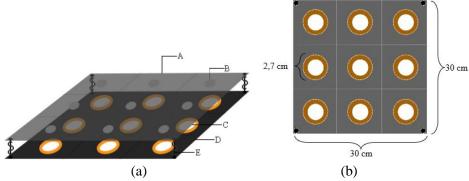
(a) Front View Prototype Design; (b) Top View Prototype Design
